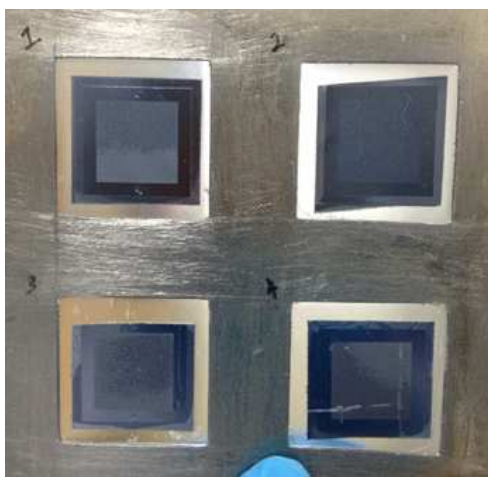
PMMA samples after casting, using hot press, and prior demoulding. In window “4” a mould cracked during the compression moulding is visible.
